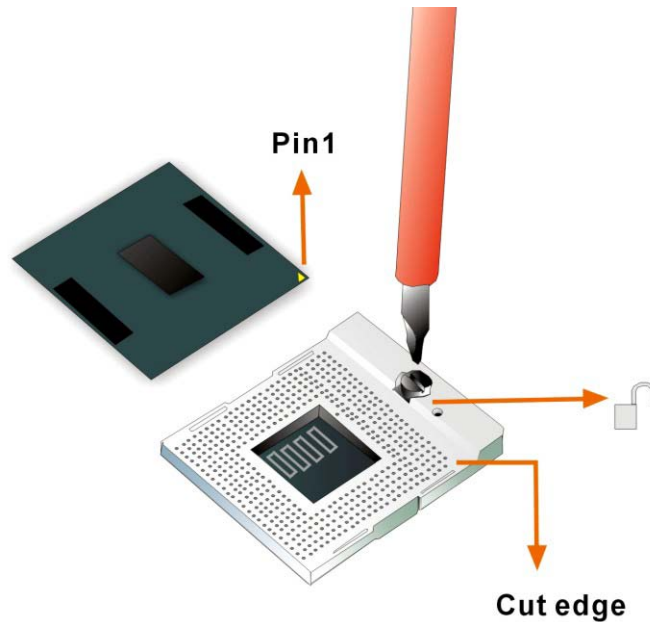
Make sure the CPU socket retention screw is unlocked
